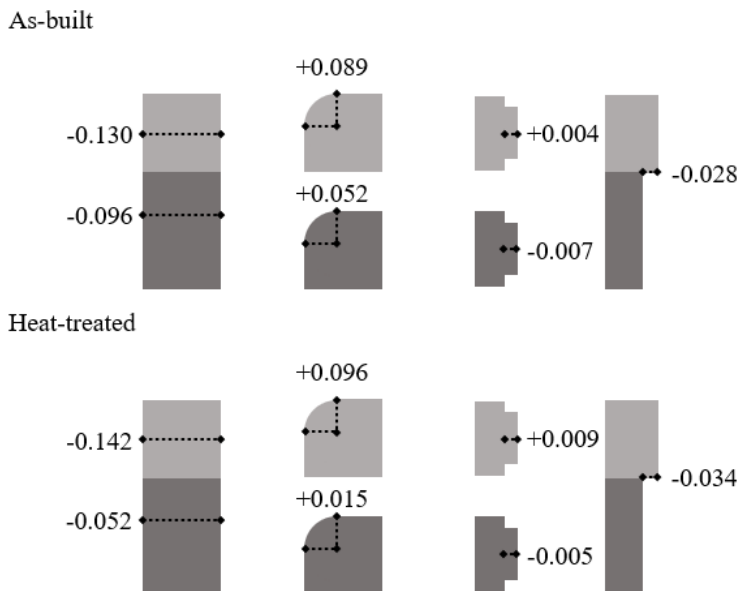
The deviation of the measured workpiece dimensions from the ideal workpiece dimensions given in millimeters. The negative sign signifies a dimension smaller than the ideal while a positive signifies opposite.
